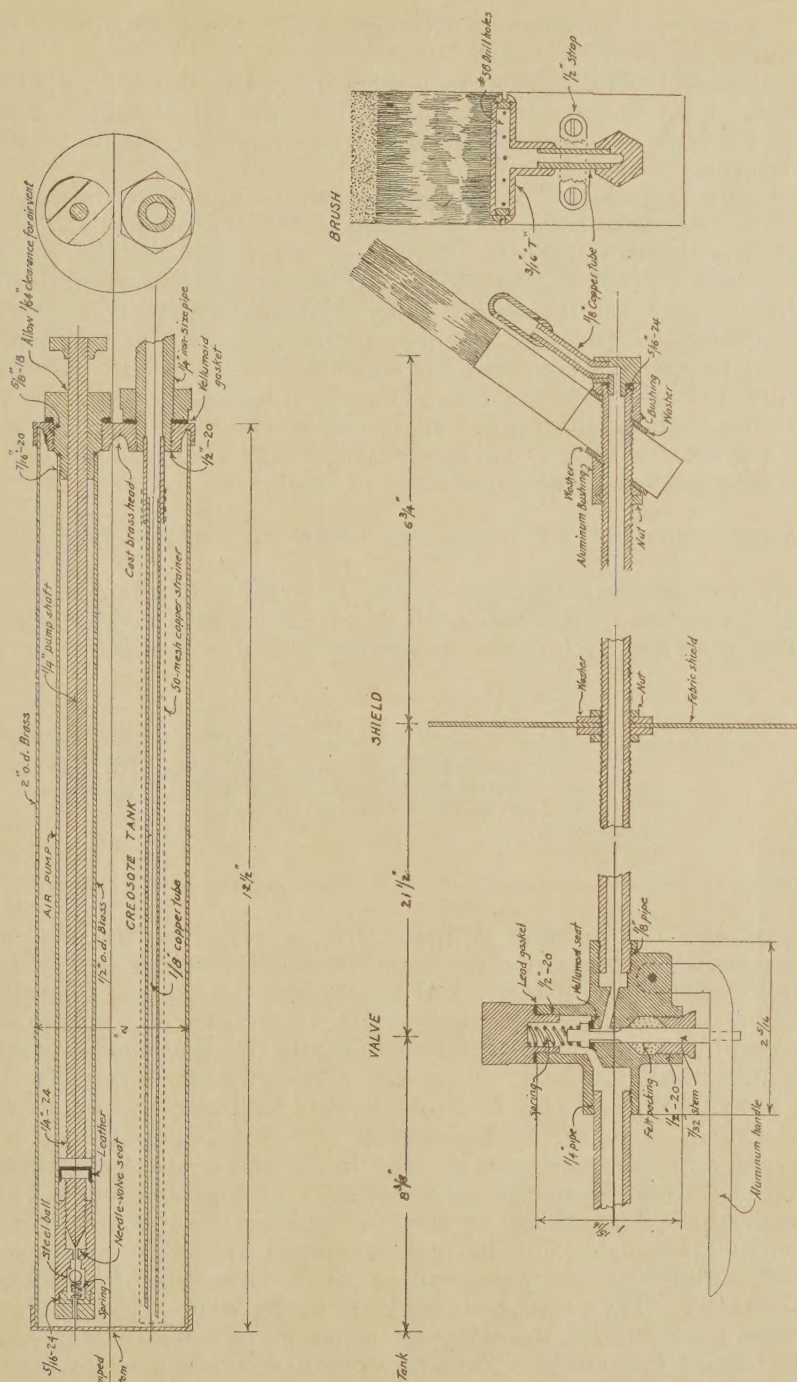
Details of the tank, valve, shield, and brush of the air-pressure extension brush
